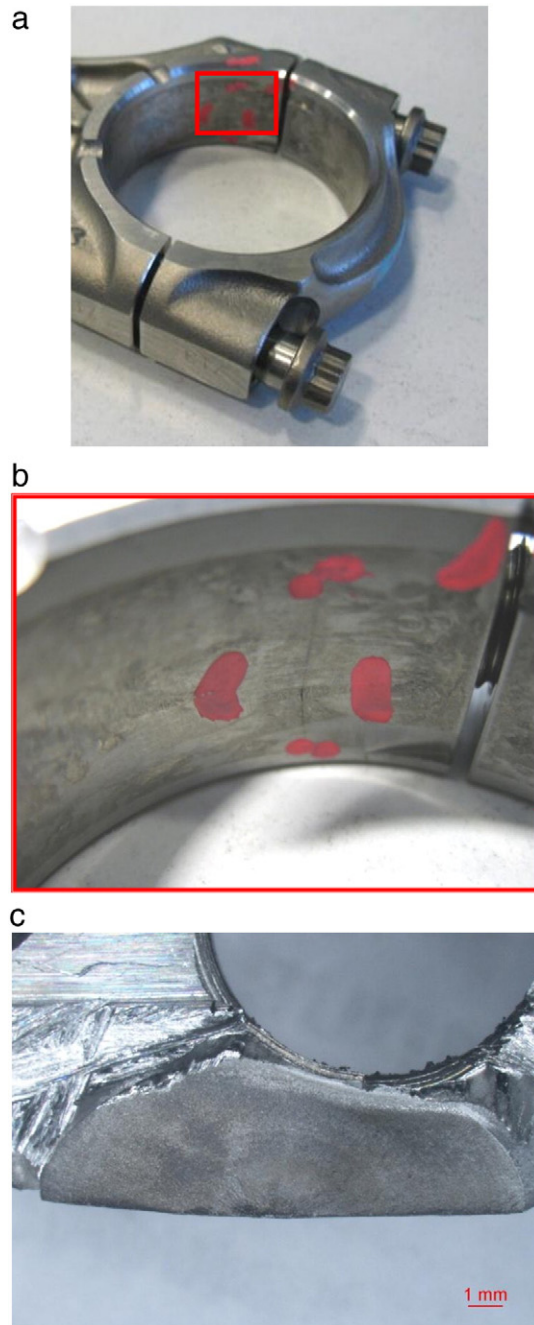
Fretting fatigue crack propagating from the big end inner border: (a) global view; (b) detailed view; (c) fracture section.
